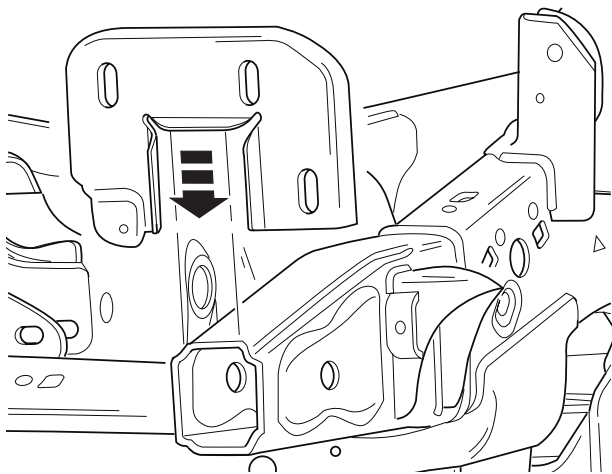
FRONT BUMPER BRACKET PLACEMENT
